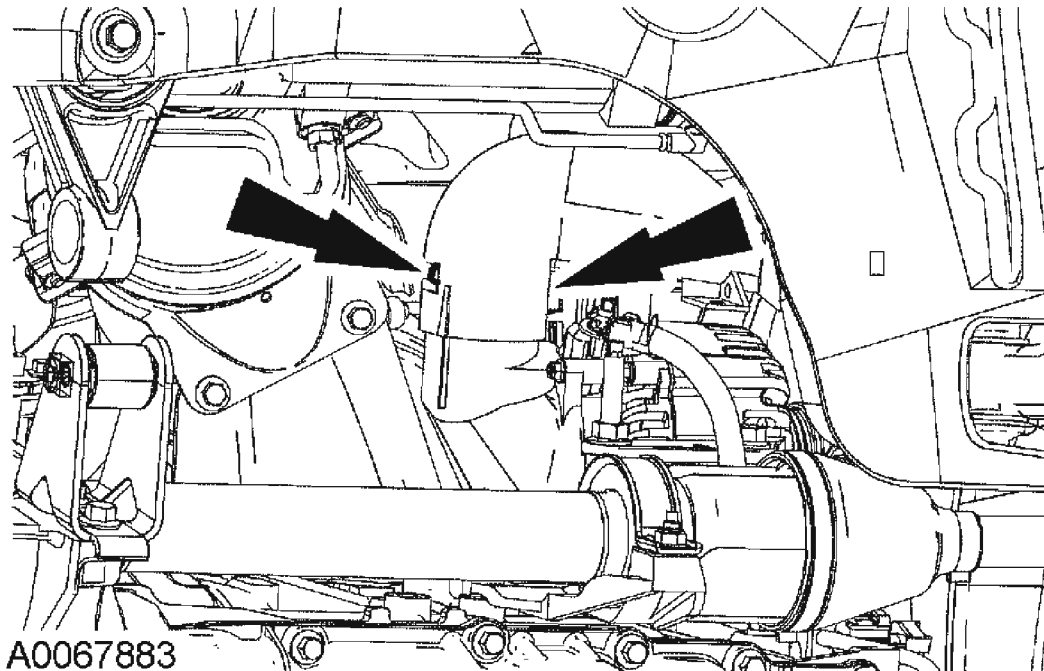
Releasing Two Air Intake Tube Retainers And Removing Air Intake Tube Assembly
